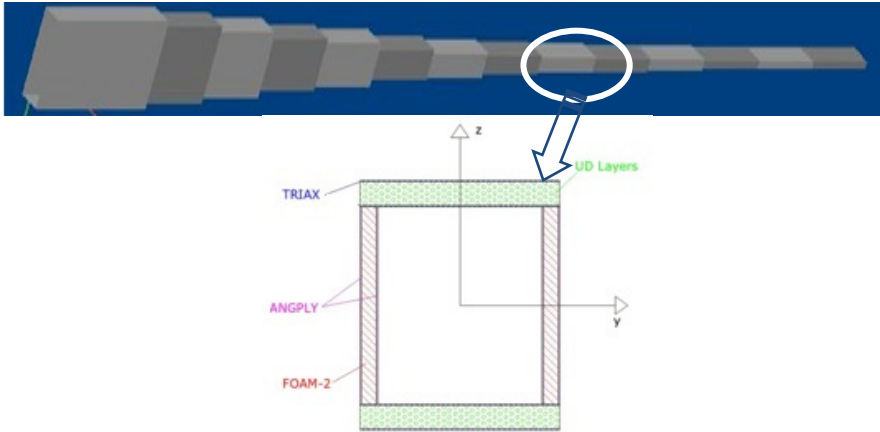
Girder box cross-section variation size and typical cross-section at 25.2m of blade span
